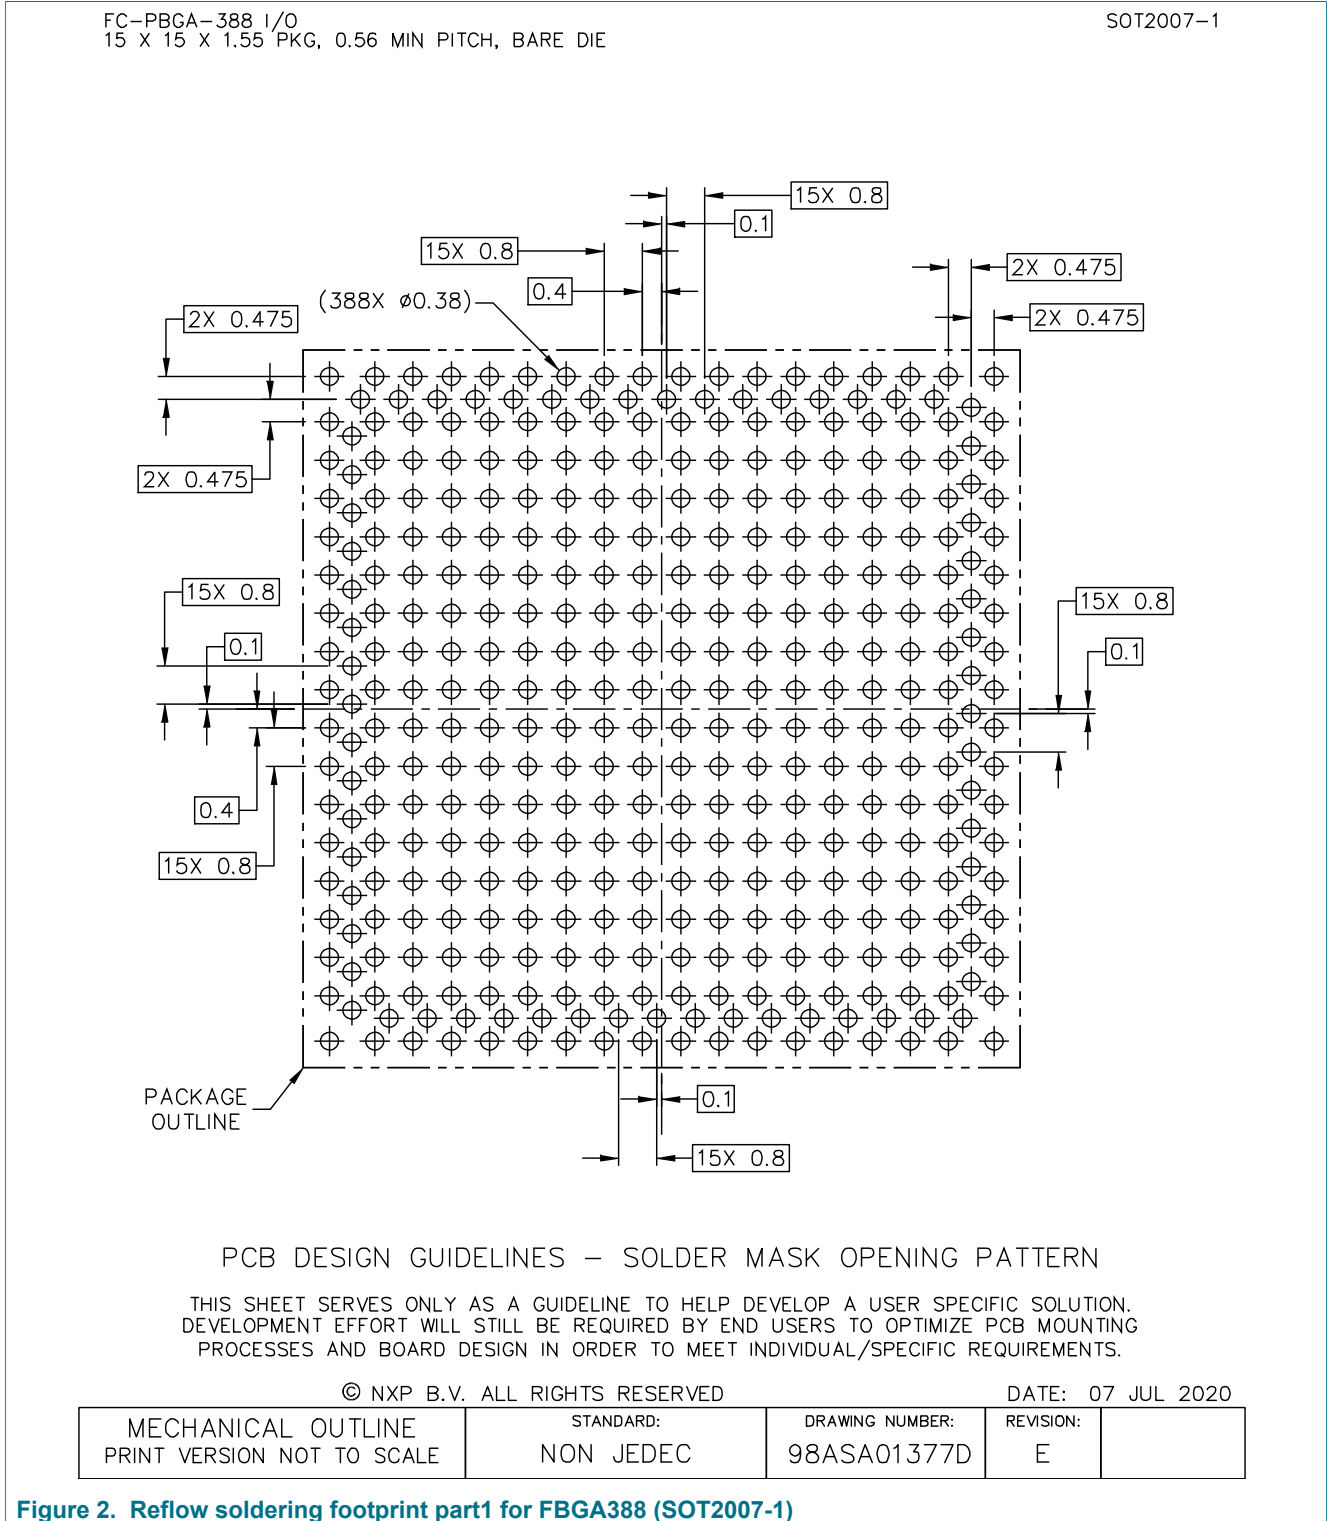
Reflow soldering footprint part1 for FBGA388 (SOT2007-1)
